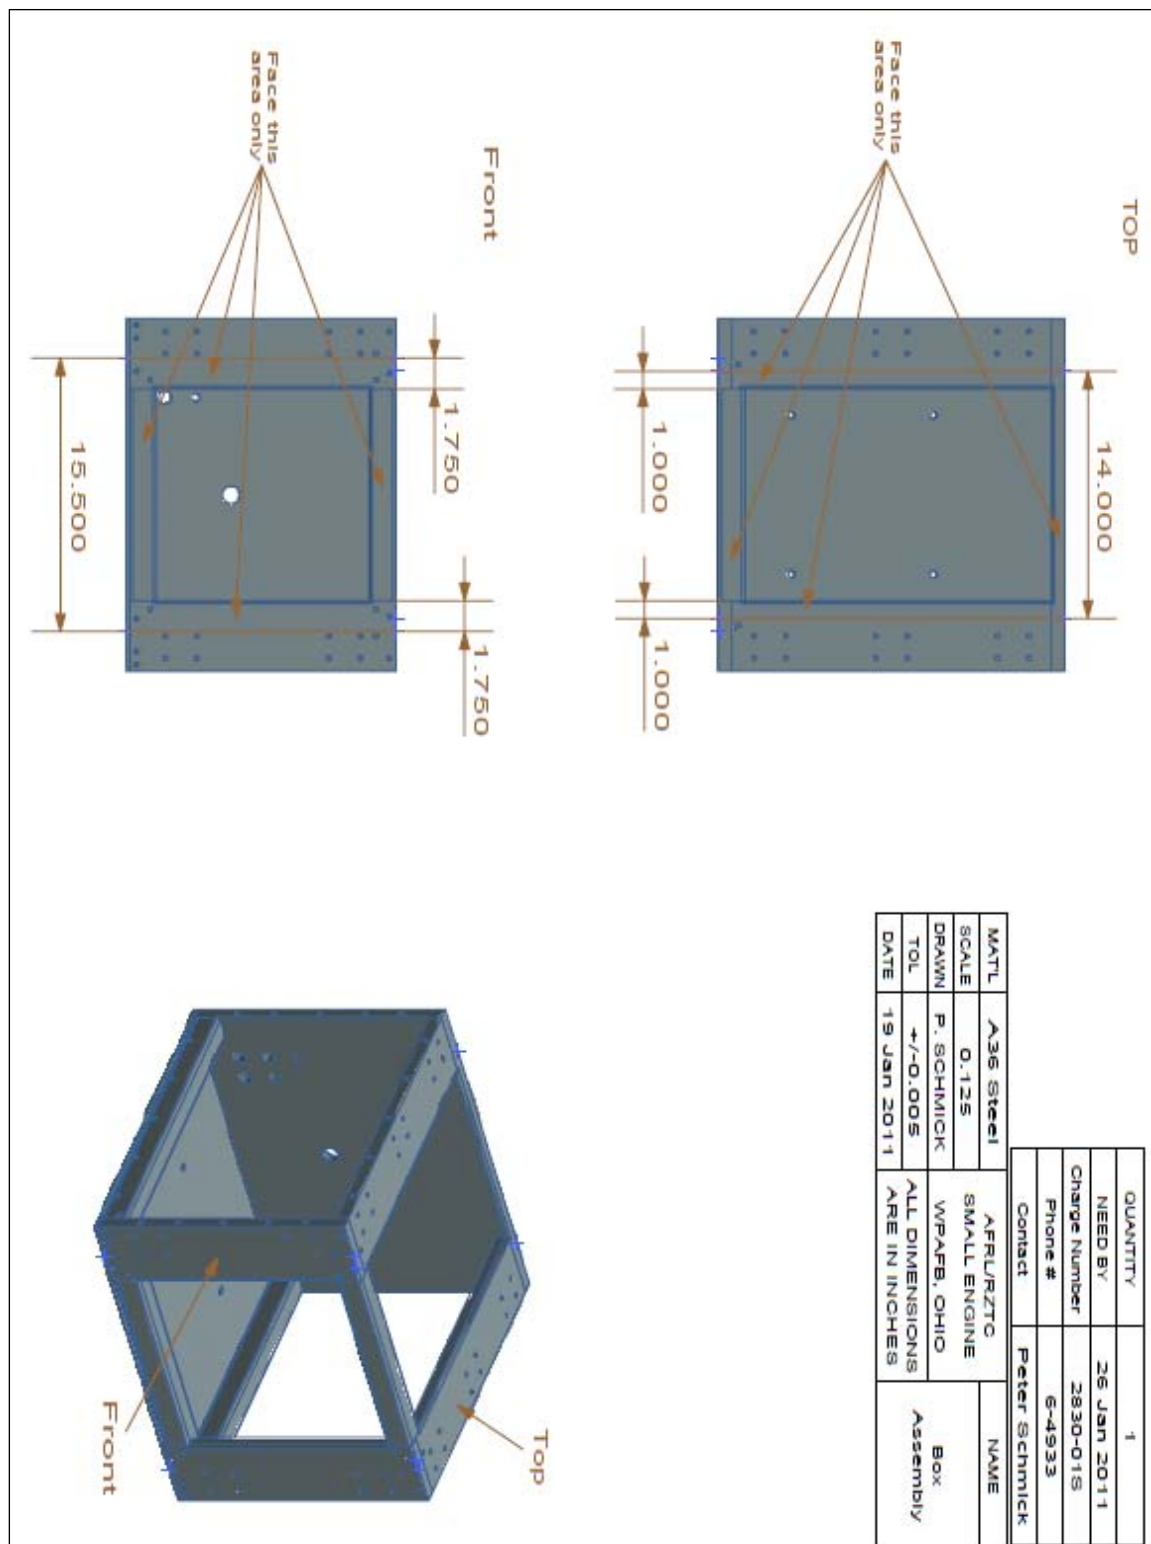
Machine shop drawing of assembled chamber with instructions to create level surface for top and front viewing windows.
